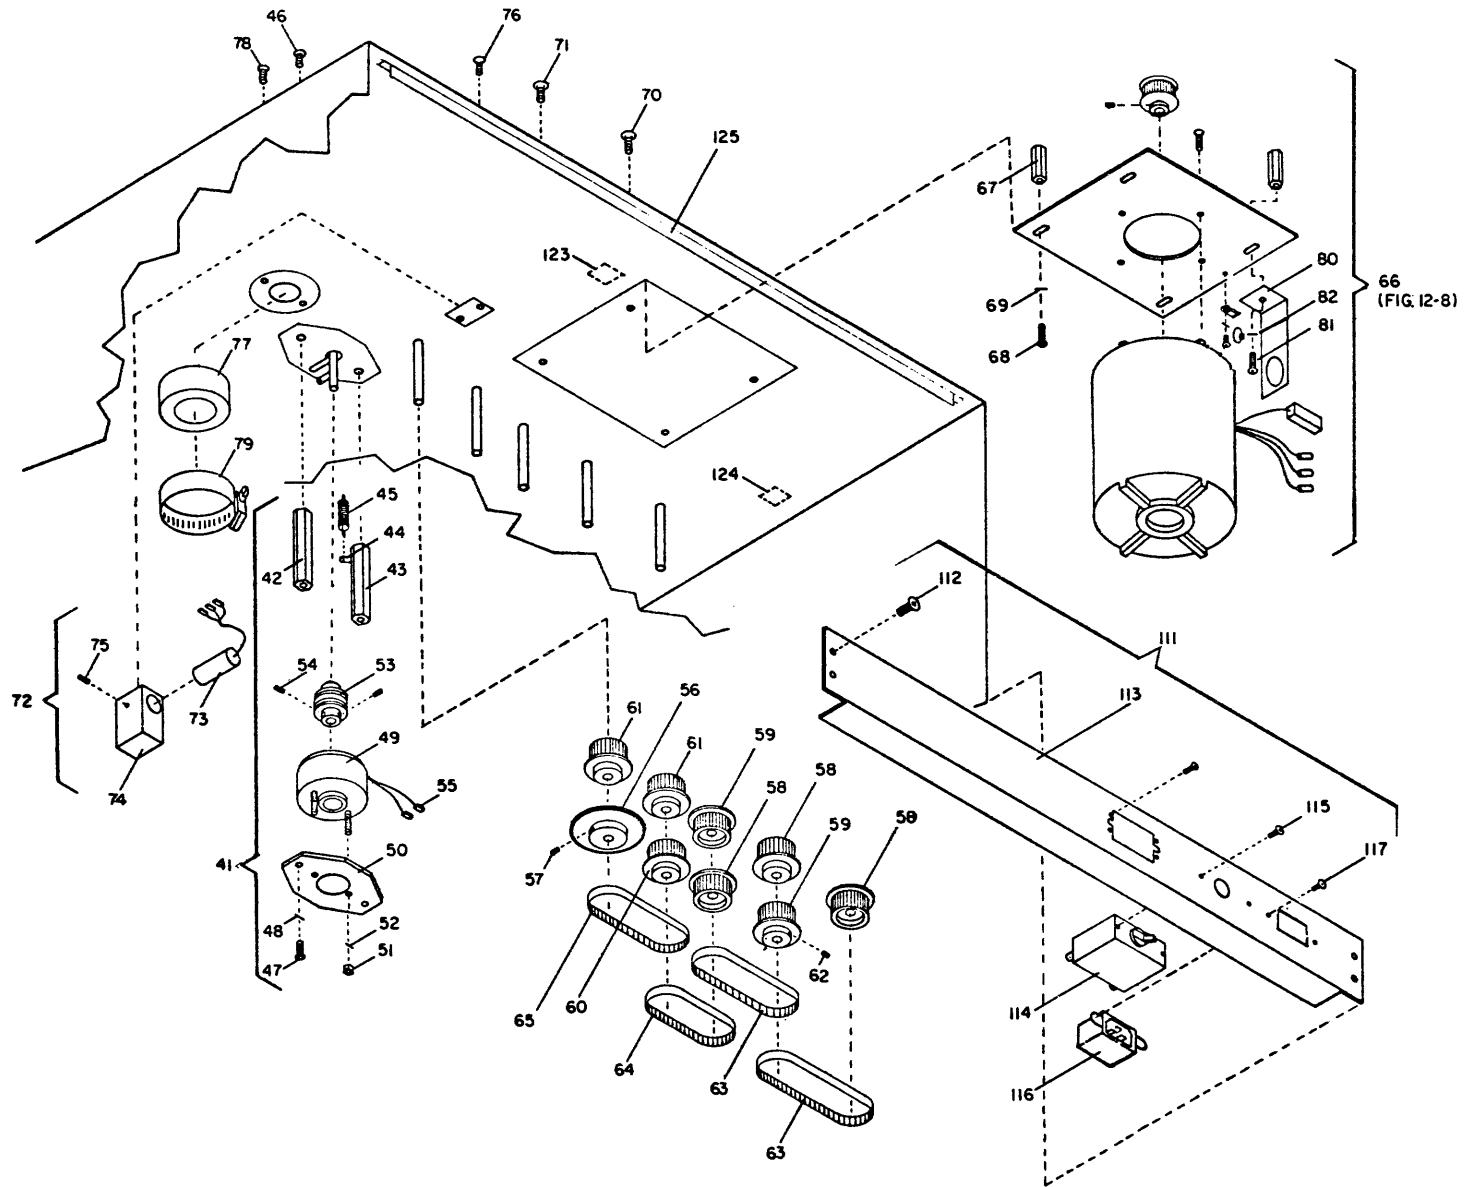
MAIN FRAME ASSEMBLY (sheet 3 of 3)
